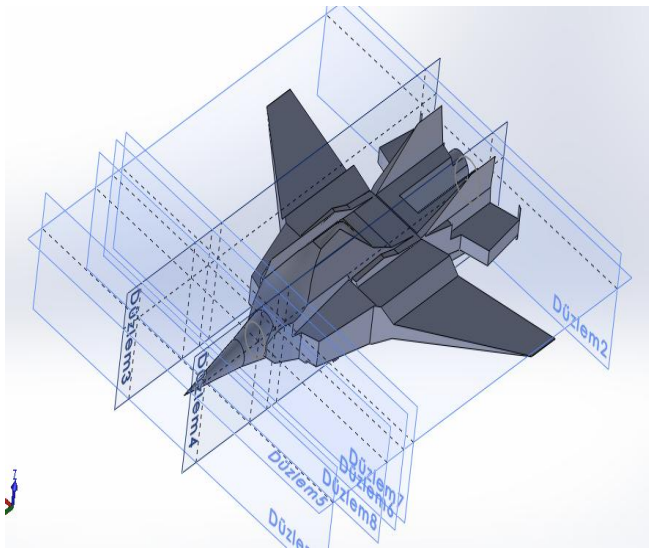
Front Sight (See Appendix for other dimensions and technical drawings)
